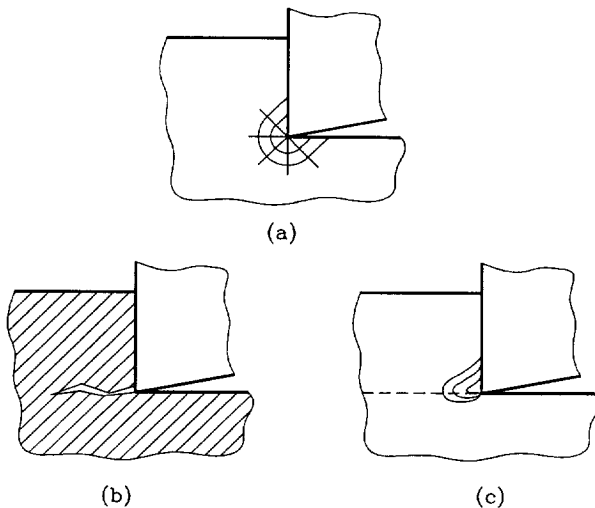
Cutting edge starting to penetrate into the workpiece.
